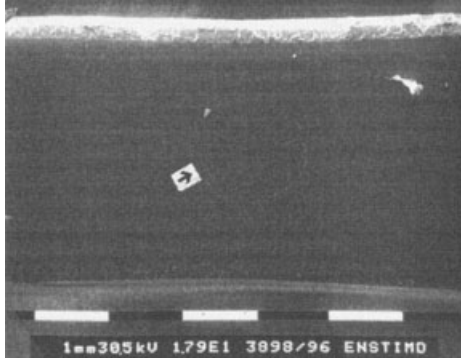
Fracture surface of a specimen without a weld line (PS; 1 dash = 1 mm).
